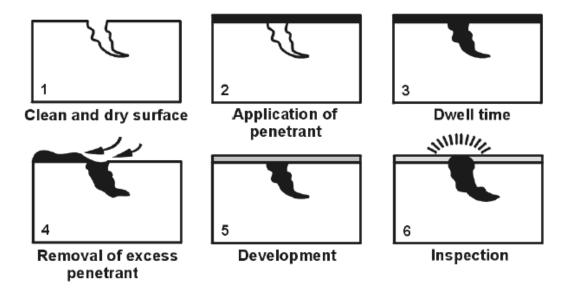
Penetrant testing procedure. Adapted from Canadian Welding Bureau. (2006)
